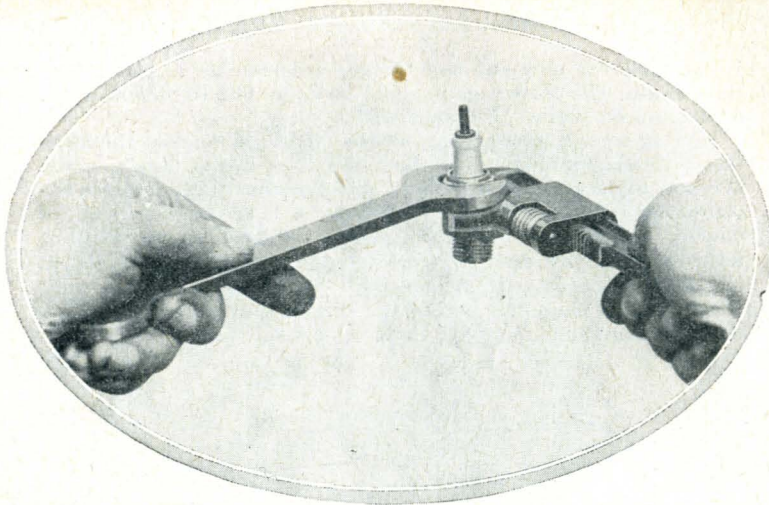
TAKING A PLUG TO PIECES FOR CLEANING PURPOSES
